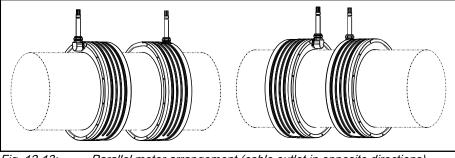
Parallel motor arrangement (cable outlet in opposite directions)
